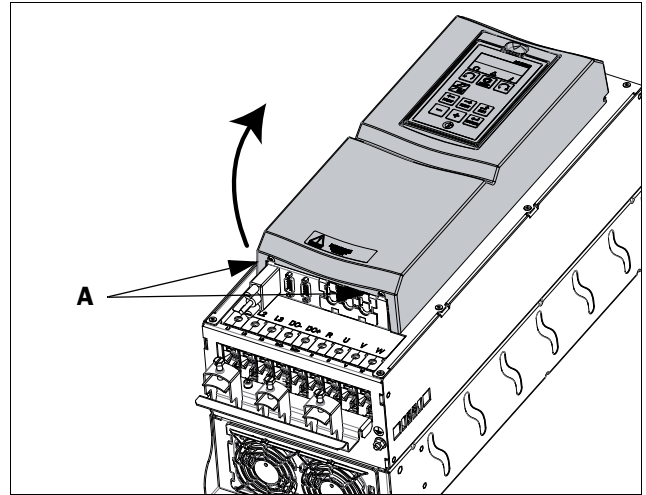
Remove the front cover on frame size C2 - F2 and FA2 (principle drawing).
